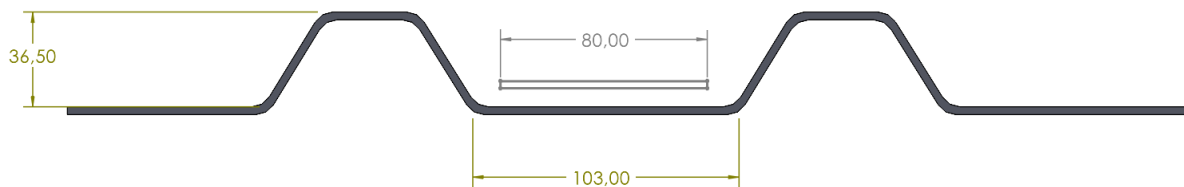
CAD cross sectional drawing of a standard IBR sheeting
